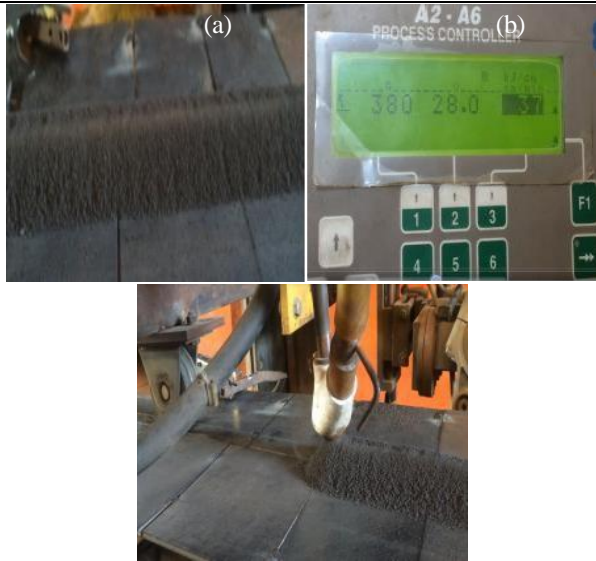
(a) Specimens (A and B) with agglomerated fluxes, (b) welding parameters and (c) during welding process.
